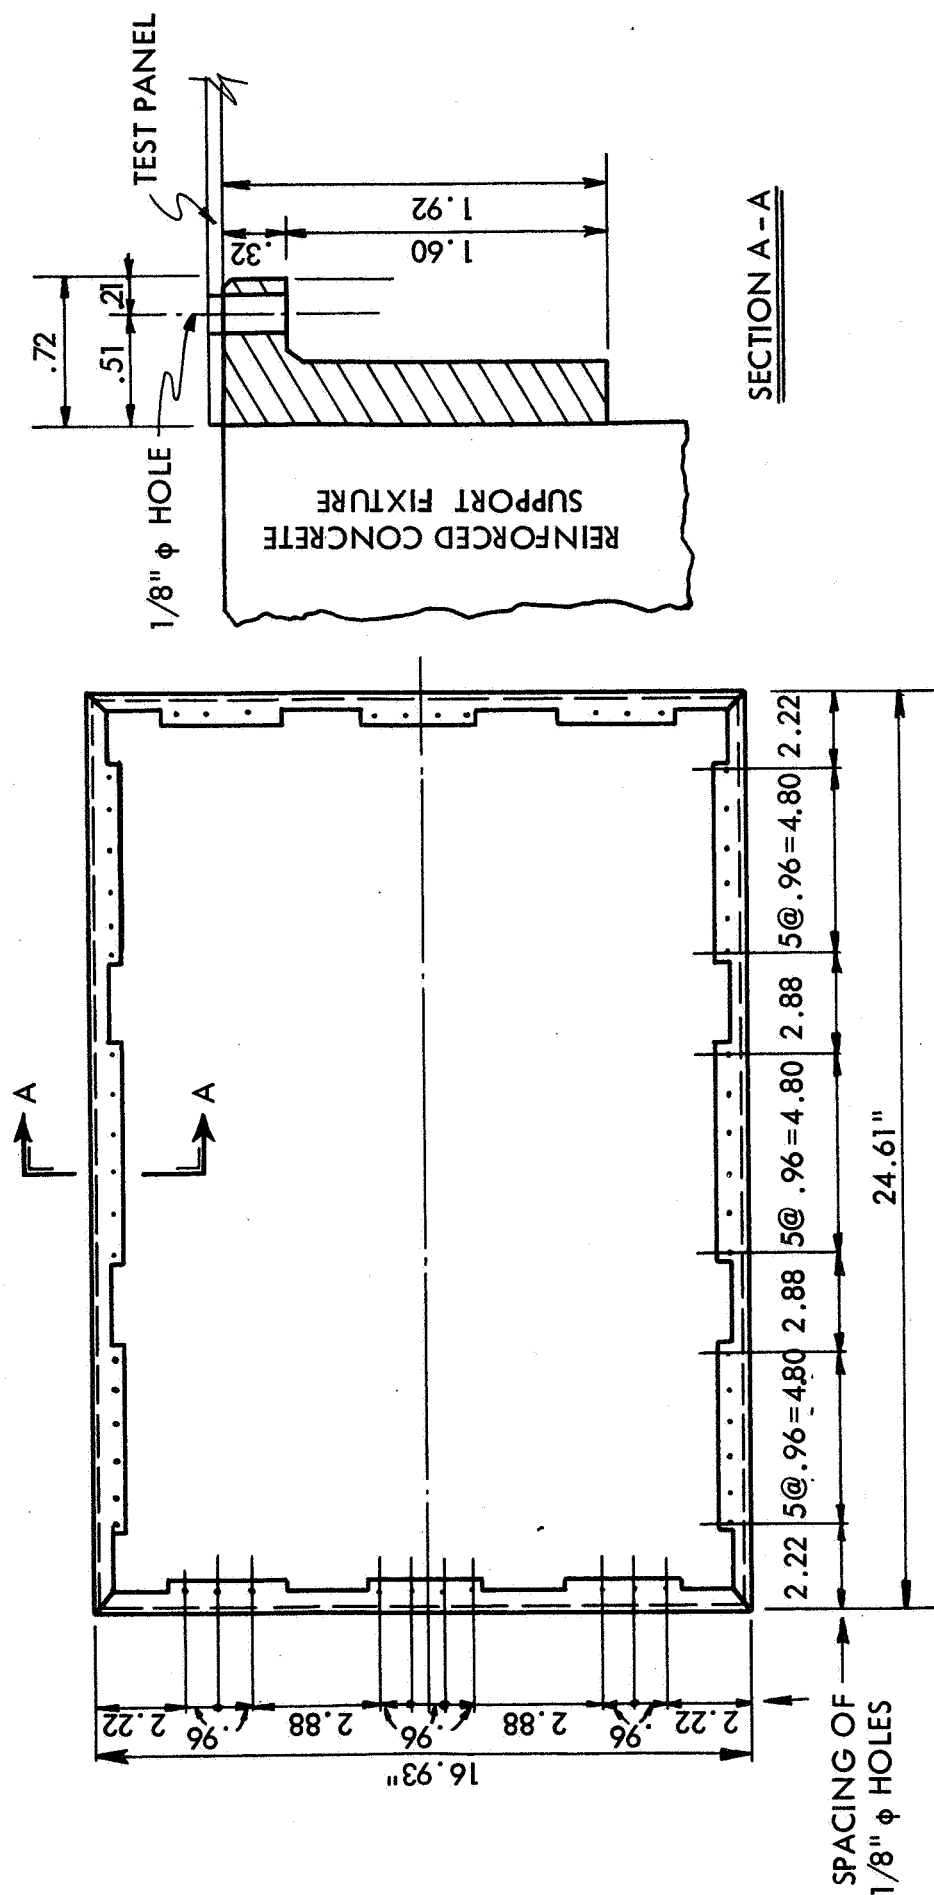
ALUMINUM FRAME FIXTURE
